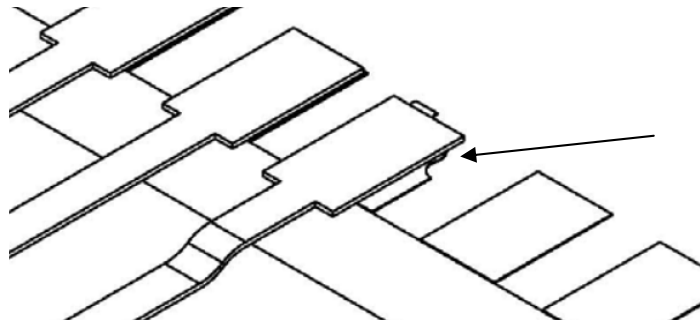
Missing braze pad metallization under a brazed lead head
